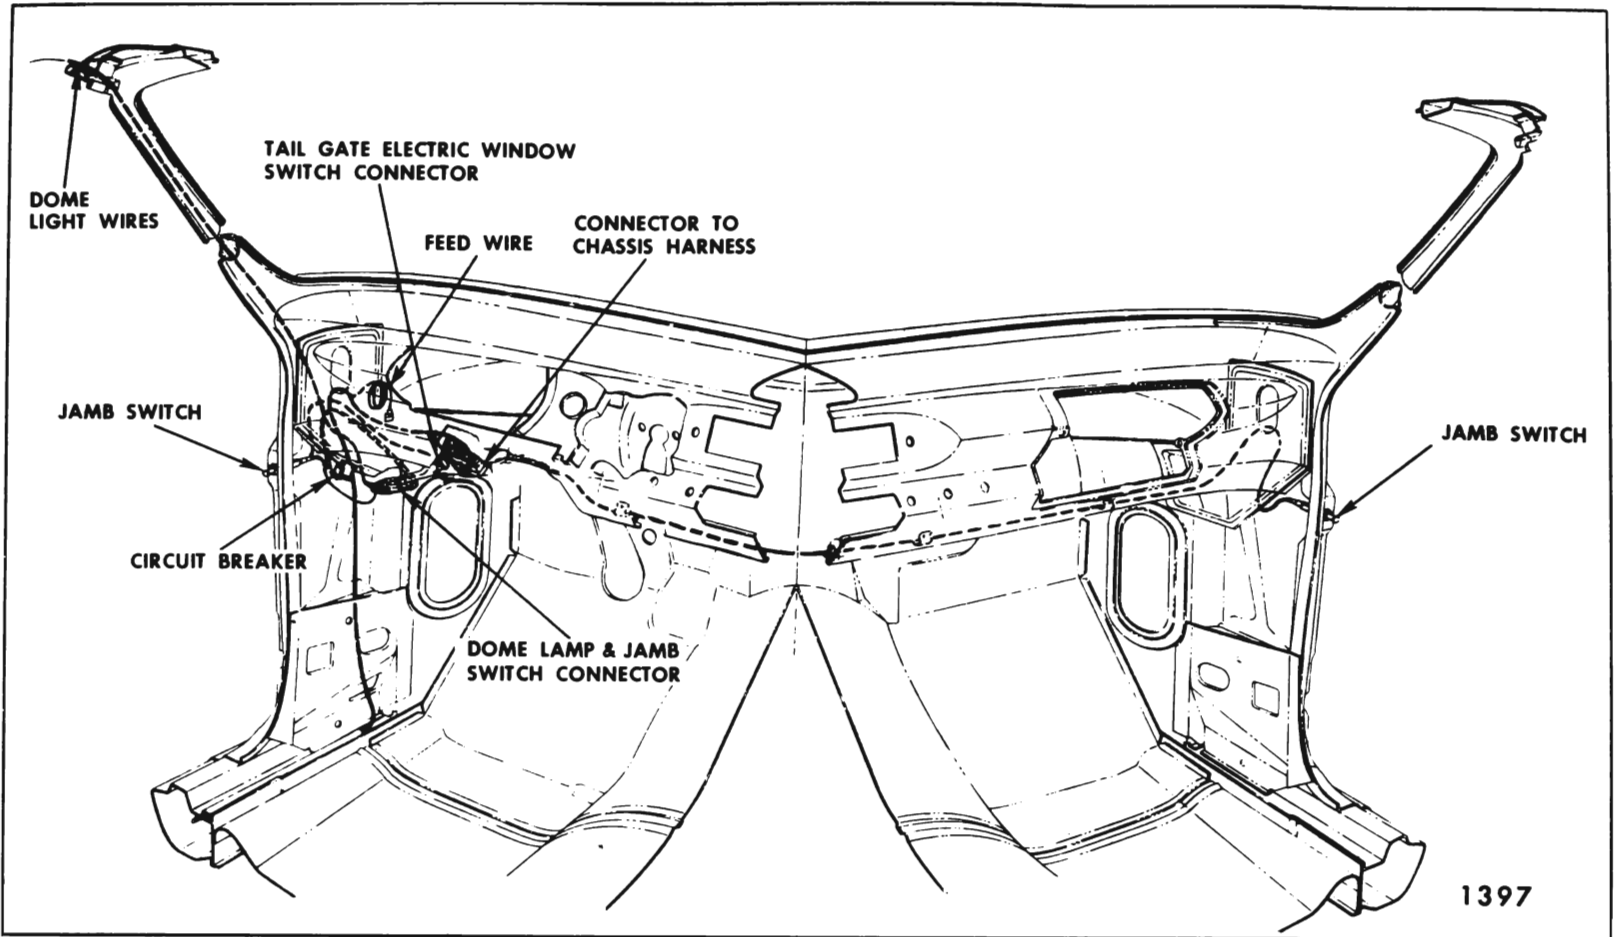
Front End Wiring - Chevrolet "X" Bodies
